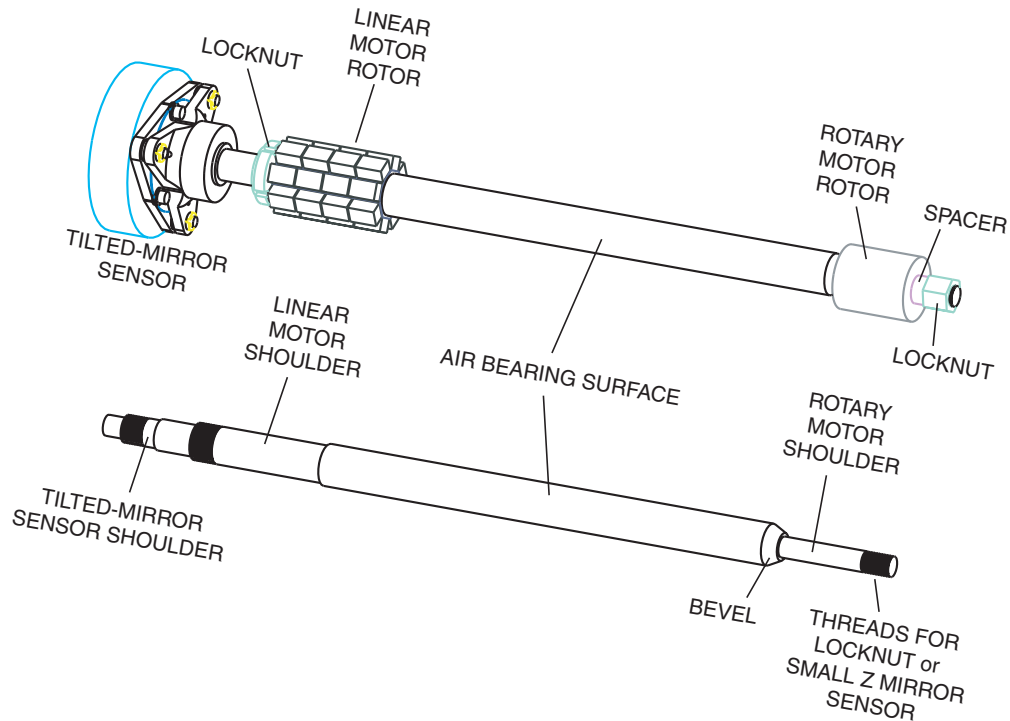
Prototype rotary-linear axis shaft geometry and assembled components. The motors are designed for high accelerations, and the masses and inertias of the moving shaft and attached components have been minimized. The magnetic rotors and mirror mounts are axially clamped to shoulders in the shaft. Thus, they can be disassembled and used on future prototypes.
